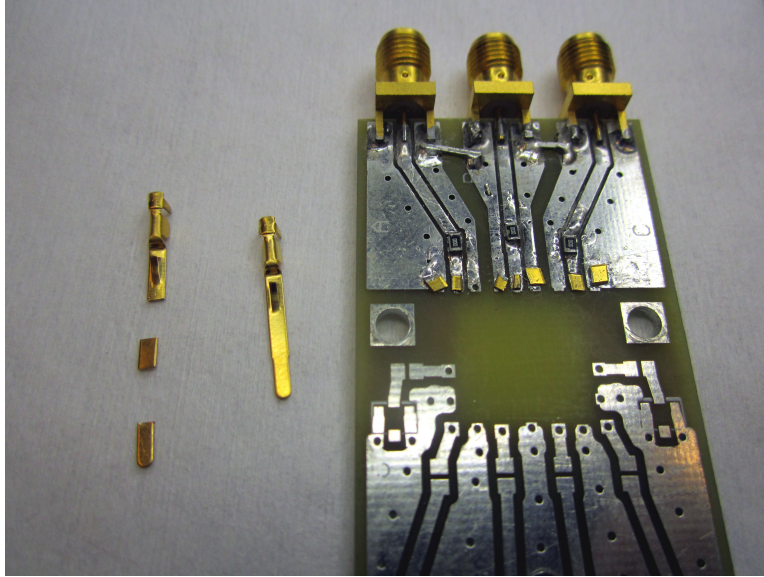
Photograph of gold-coated components which have been cut into pieces and soldered to the PCB to act as a wirebonding targets.
